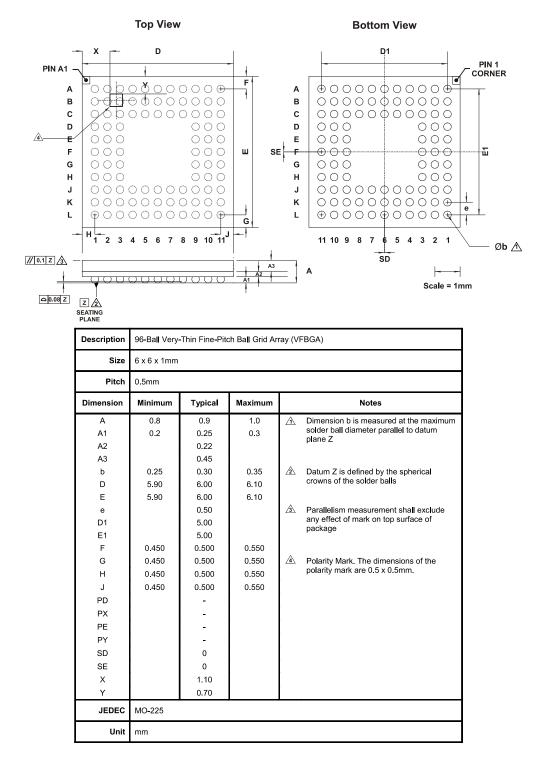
BlueCore4-External 96-Ball VFBGA Package Dimensions
